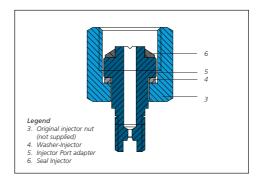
Image of the Injector showing the SilTite™ FingerTite injector adapter assembly
